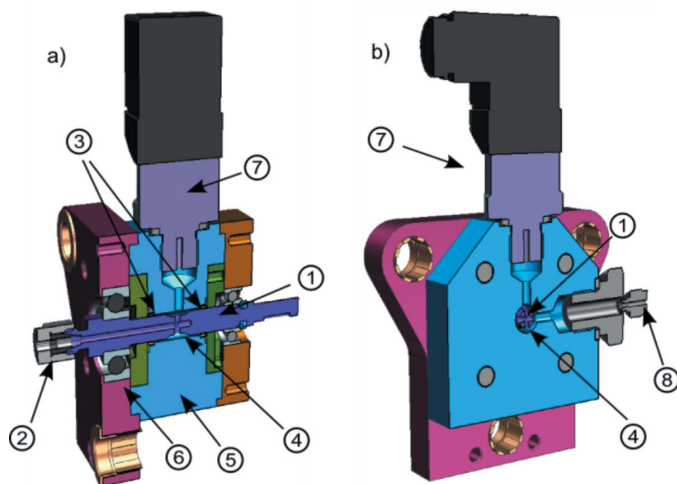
Cross sections of the side supports. (a) Longitudinal view. (b) Transversal view. 1: Main shaft; 2: tube compression fitting system; 3: PTFE seals; 4: exchanger chamber; 5: support body; 6: front bearing; 7: pressure measurement; 8: pressure inlet.
